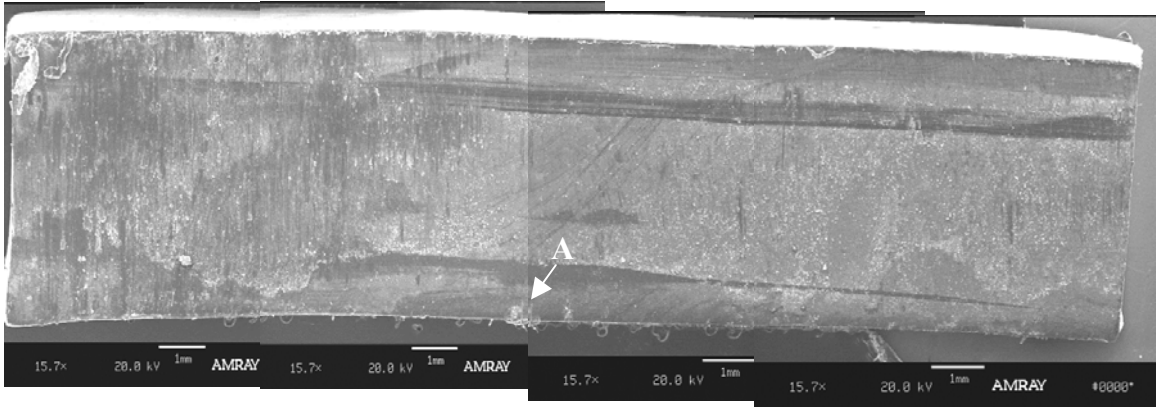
General view of fracture surface of Specimen 2 from Sample 131-SB-SE-6
